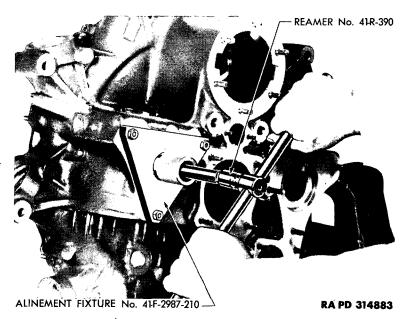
Line Reaming Accessory Drive Shaft Bushings
